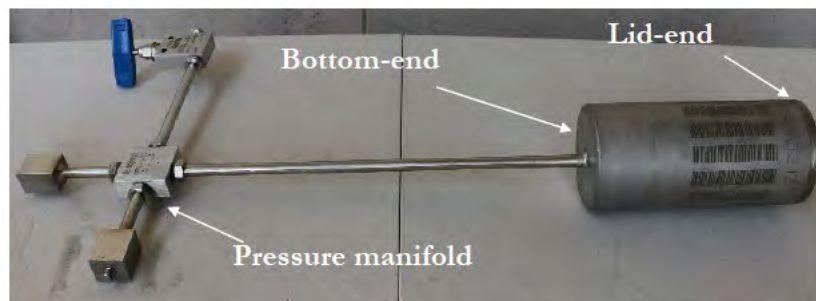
Typical tested 3013 container with welded pressure tap on bottom-end.
